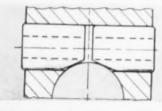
An angular flat is milled on the particular clamp shown in this sketch.
